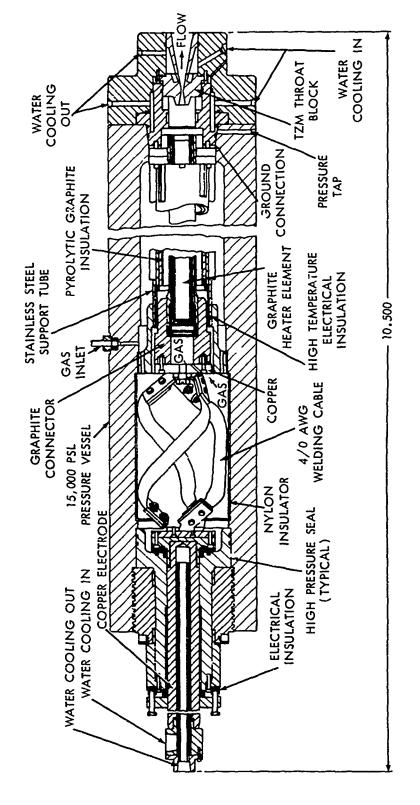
CROSS SECTION DRAWING OF HEATER ASSEMBLY
